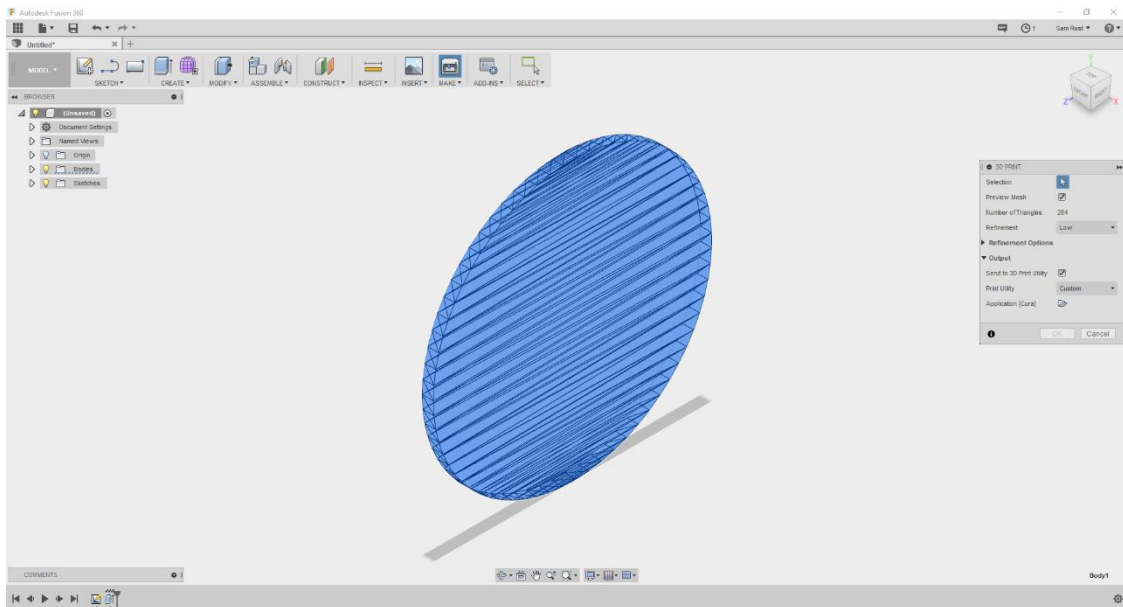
CAD model of a cylindrical sample after being converted to STL file type.
